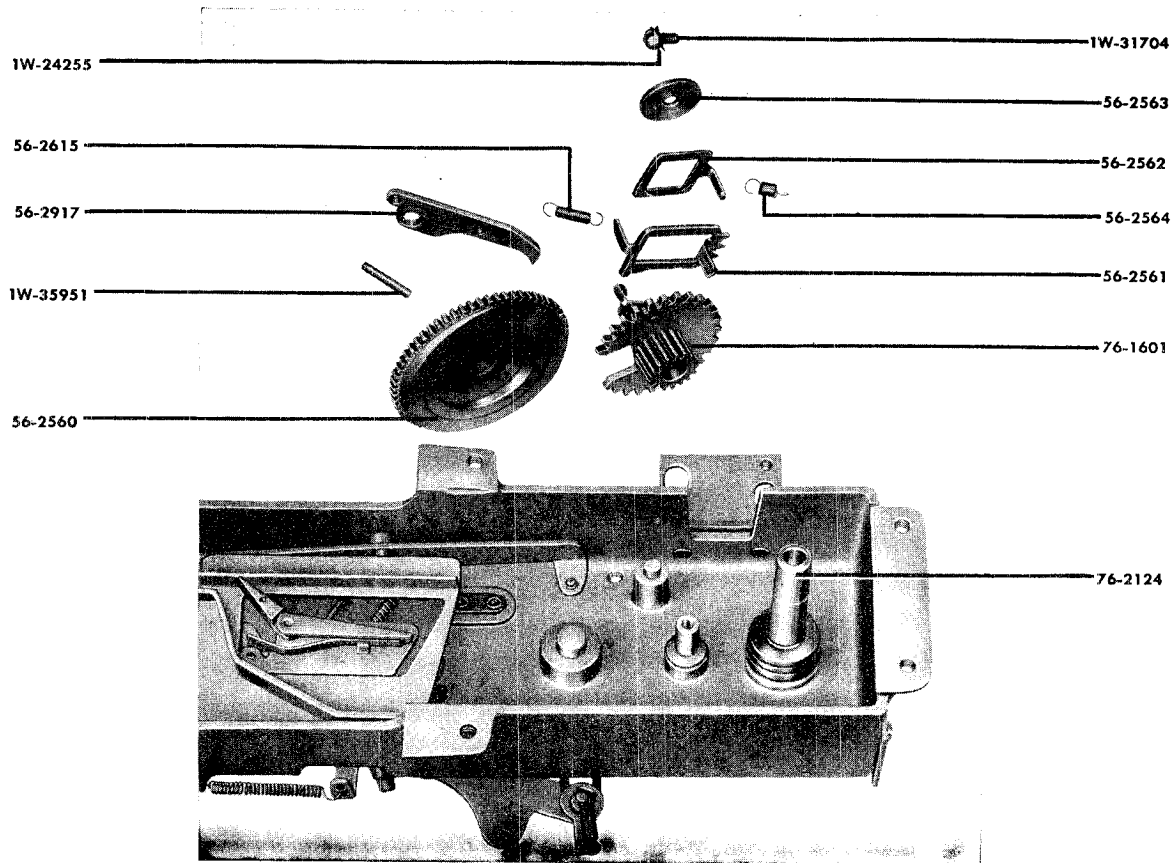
PARTS OF MAIN-GEAR AND INTERMEDIATE-GEAR ASSEMBLIES, UNDERSIDE VIEW.
